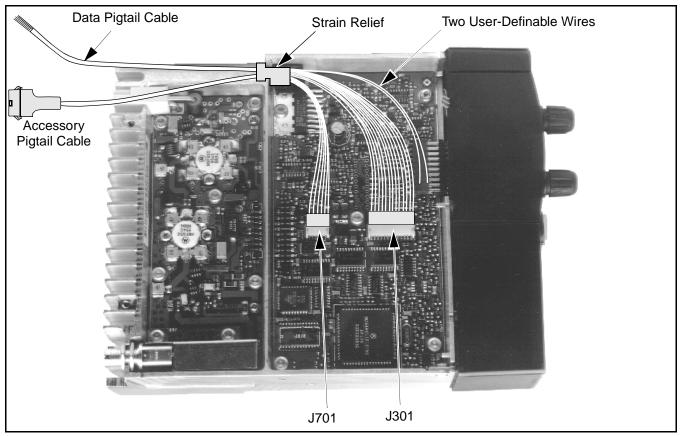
Data Cable Installation (-001 Cable Shown)
